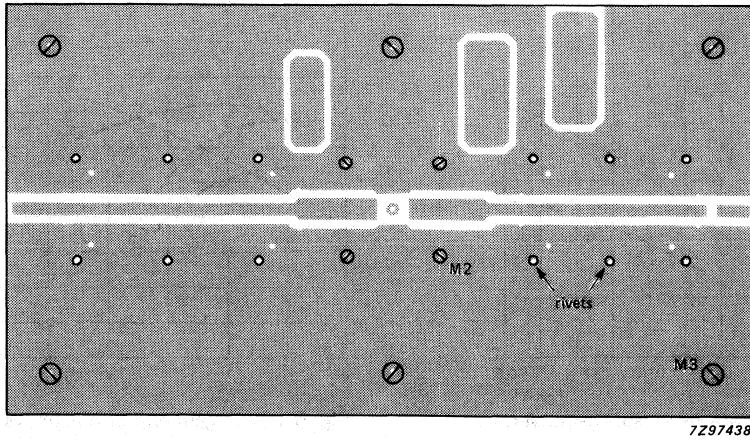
Printed wiring board and component lay-out for 900 MHz class-B test circuit.
